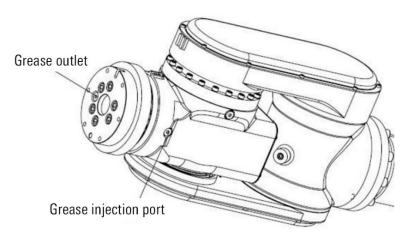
Replace the lubricating grease of the J6 axis reducer
